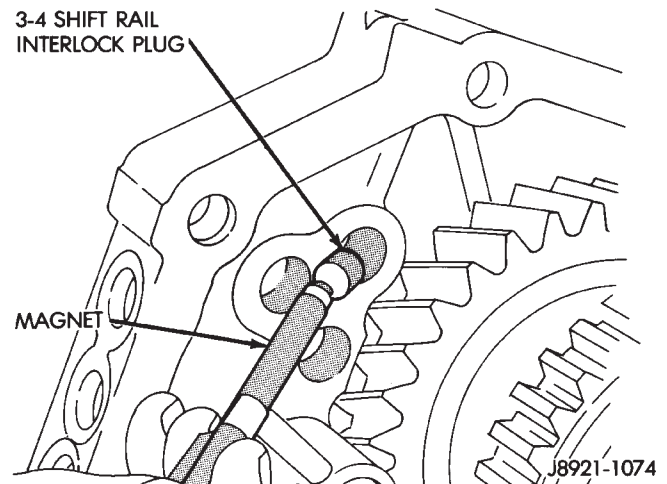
Removing 3-4 Shift Rail Interlock Plug
